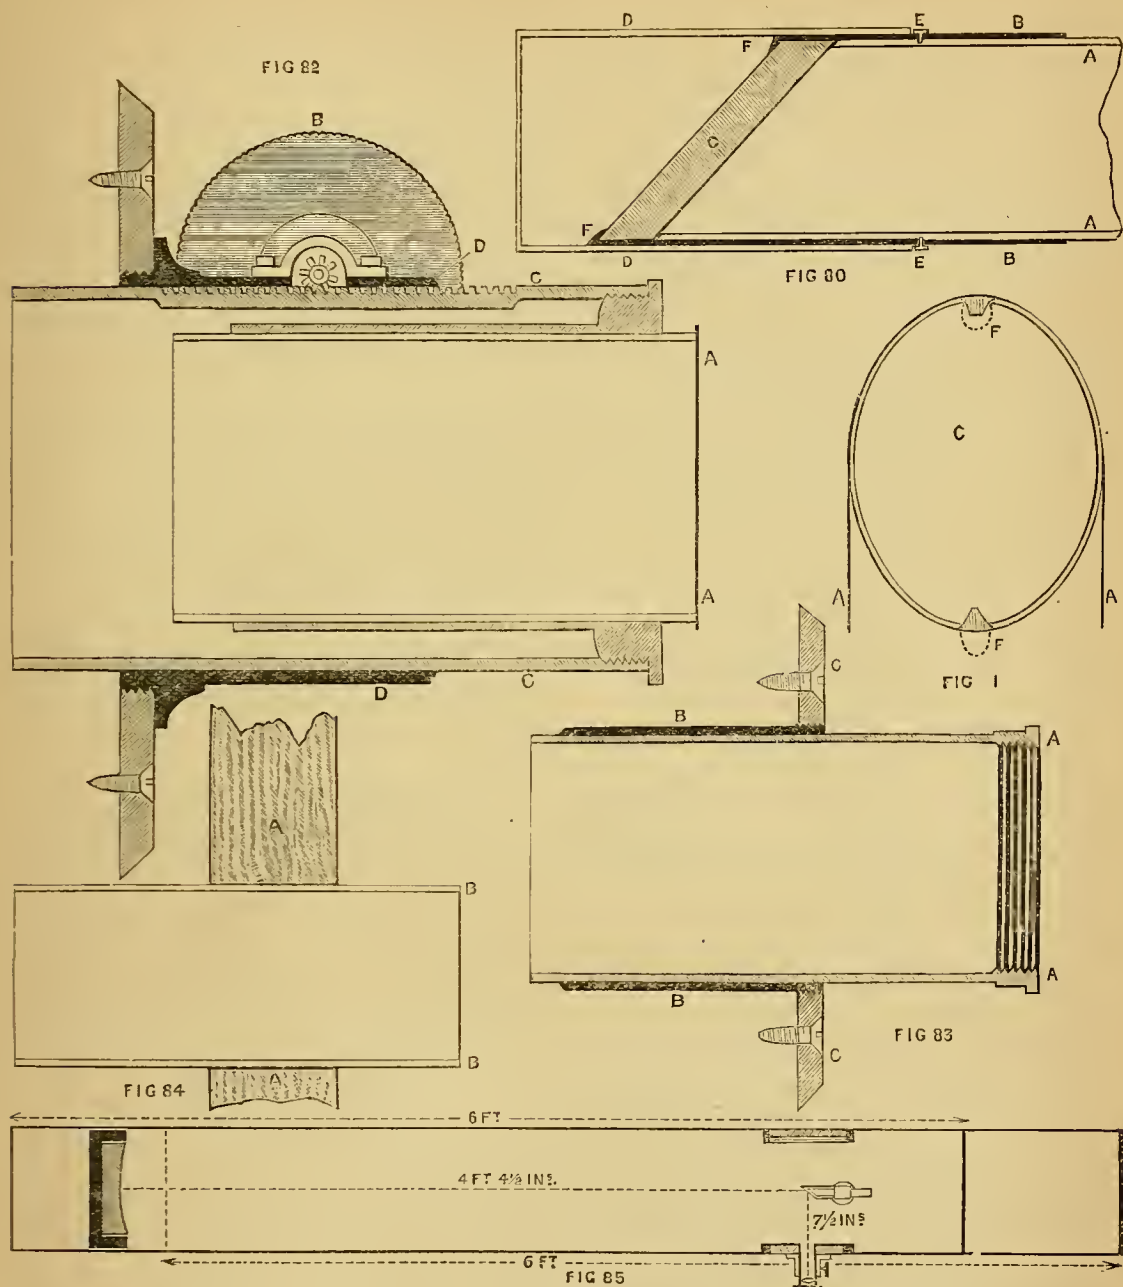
MOUNTING FOR SMALL MIRROR—A, Inner Tubing; B, Outer Tubing accurately fitting round Flat and Inner Tubing; C, Flat; D, Projecting Cap. FIG. 81.—DIAGRAM SHOWING HOW BRASS TONGUES F, F, SOLDERED ON TO INNER TUBING A, A, ARE TURNED DOWN TO PREVENT MIRROR C FROM SLIPPING OUT. FIG. 82.—RACK-WORK FOCUSSING APPARATUS FOR EYE-PIECE IN SECTION. *Note.*—The Eye-piece is carried in Inner Tube A, A; the focussing is performed by turning Milled Disc B, when Tube C, C, operated by means of Rack and Pinion, moves within Fixed Tube D D. FIG. 83.—SIMPLE SLIDING TUBE ADJUSTMENT FOR EYE-PIECE. *Note.*—Tube A, A, carrying Eye-piece slides within B, B, attached to Telescope by Collar C, C. FIG. 84.—SIMPLEST METHOD OF FIXING EYE-PIECE—A, A, Wooden Disc pierced in centre to receive Tubing B, B, which carries Eye-piece. FIG. 85.—DIAGRAM SHOWING RELATIVE POSITIONS AND DISTANCES OF GREATER AND LESSER SPECULA AND EYE-PIECE.
